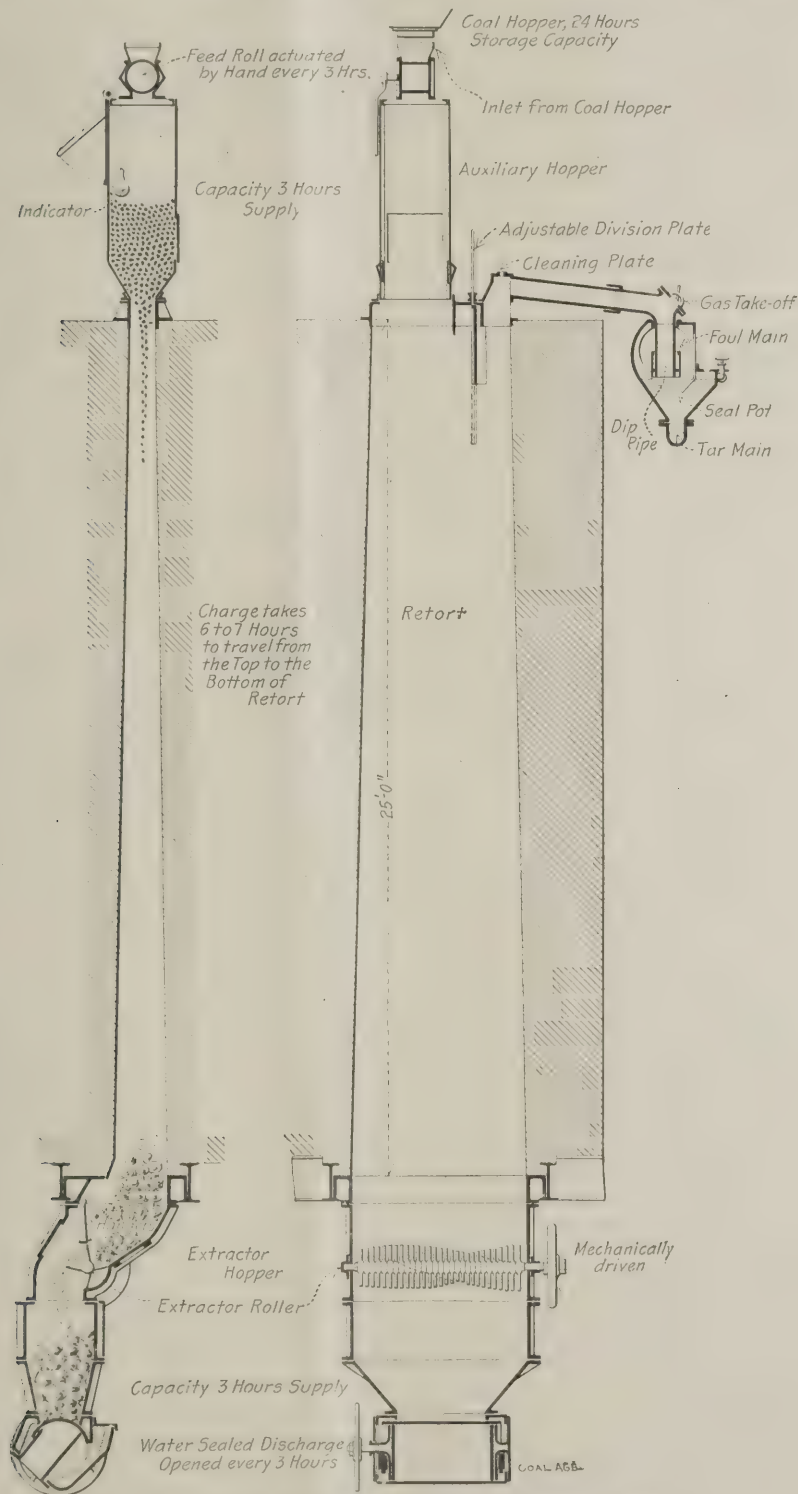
ELEVATION IN SECTION, VERTICAL RETORT OVEN
